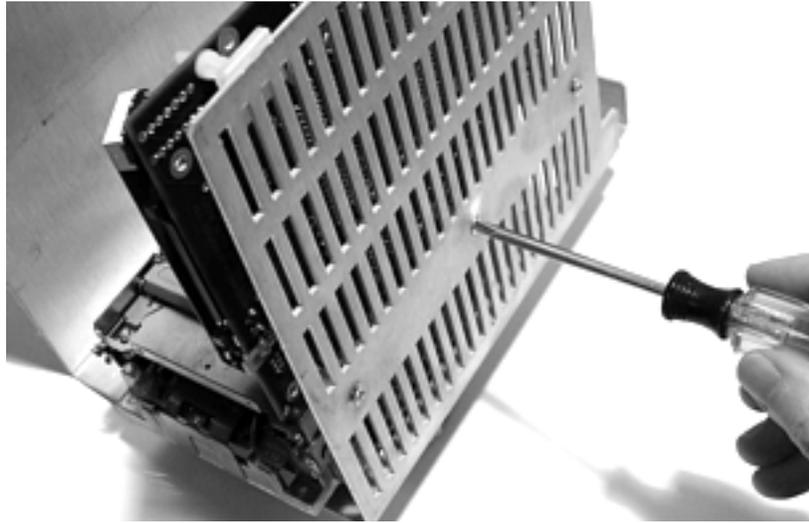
Preliminary attachment of the X/ProFile to the drive cage
